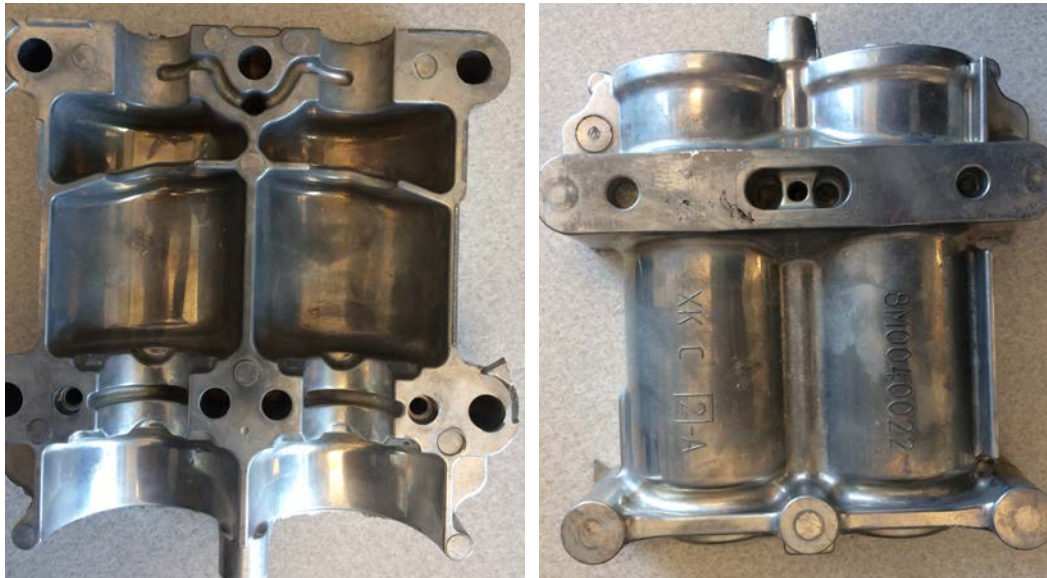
Photographs of a balance shaft housing showing only minimal surface blistering after T6 heat treatment
